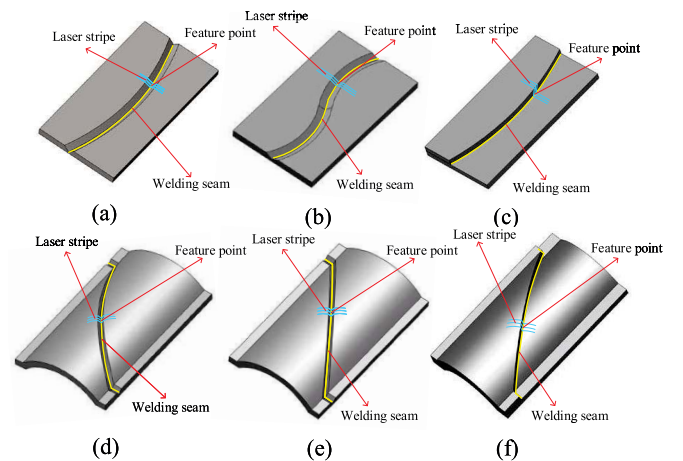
Structure diagram of six welding workpieces. (a) 2-D-B/C. (b) 2-D-L/C. (c) 2-D-L/S. (d) 3-D-B/C. (e) 3-D-B/L. (f) 3-D-L/L.
